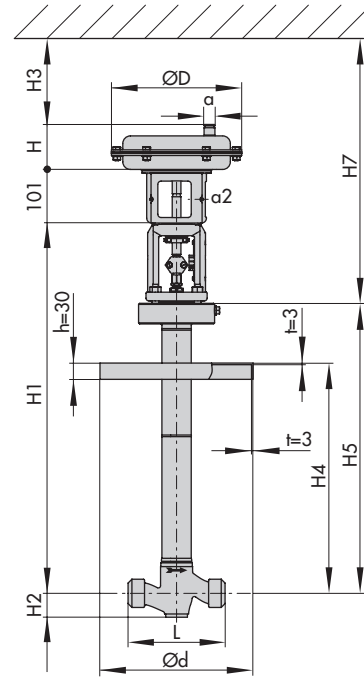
Type 3248-7 Globe Valve with stainless steel valve body
